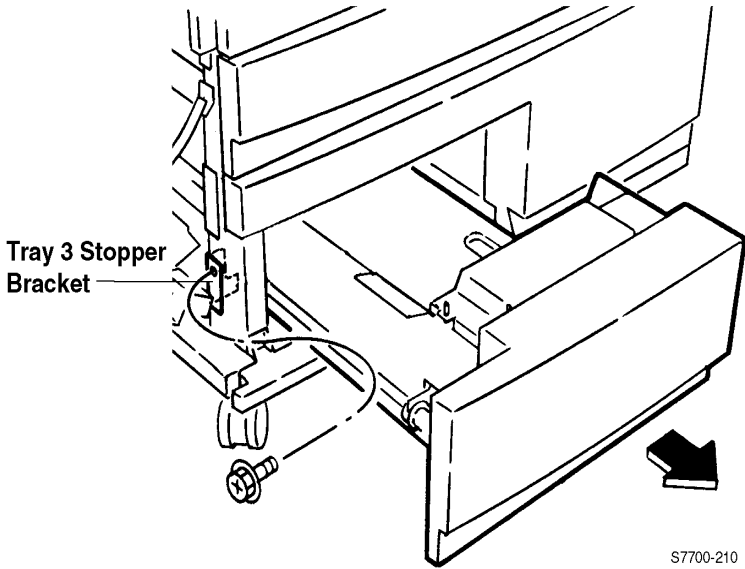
High-Capacity Feeder (HCF) Cover Assembly
